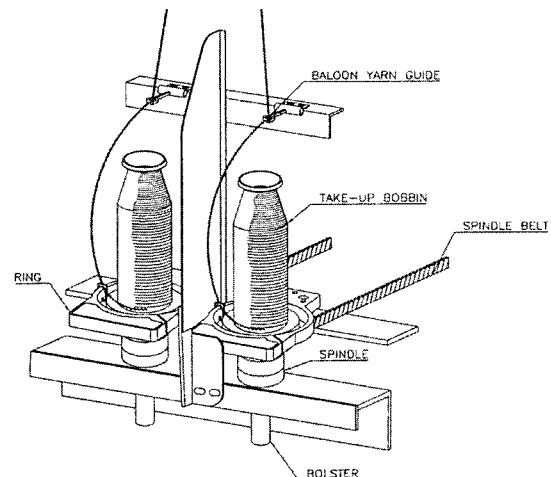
Twisting and take-up part in a cut chenille machine[1].
